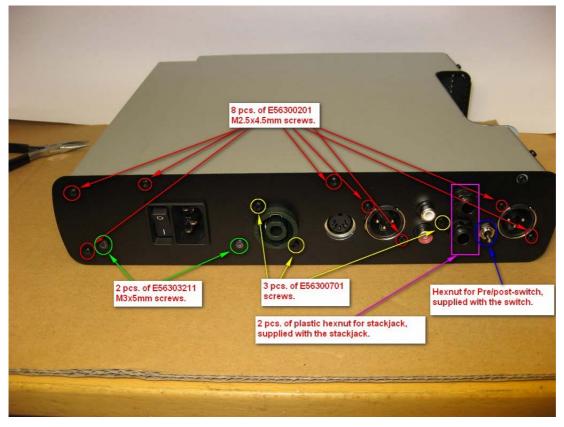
Mount the back plate using the screws/nuts shown in the picture.
